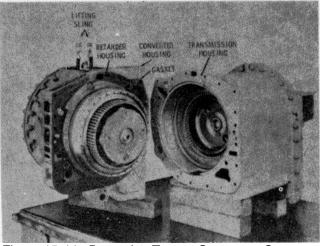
Removing Torque Converter, Converter Housing and Retarder Housing
